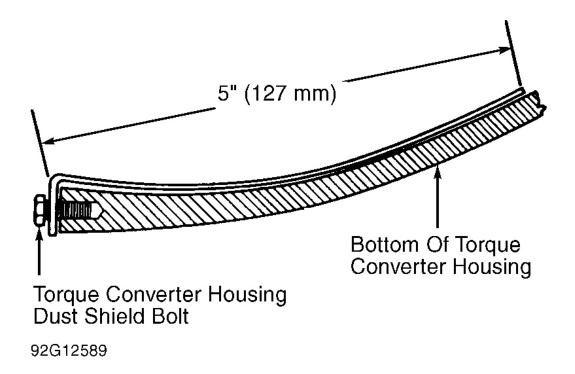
Fabricating Leakage Test Probe Courtesy of CHRYSLER CORP
